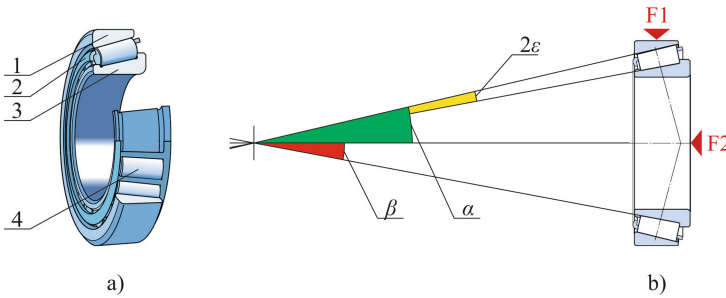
Construction: 1 – outer ring (fixed); 2 – separator; 3 – inner ring (movable); 4 – rolling elements a) and the scheme of the tapered roller bearing $\beta = \alpha - 2\epsilon$ b).
